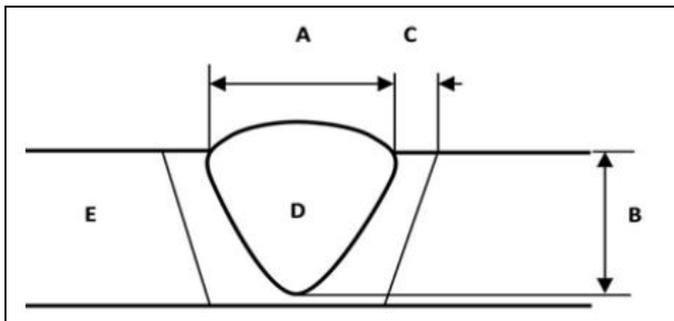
Weld bead shape parameter. A: Bead width, B: Depth of penetration, C: HAZ width, D: Weld metal, E: Base metal.
